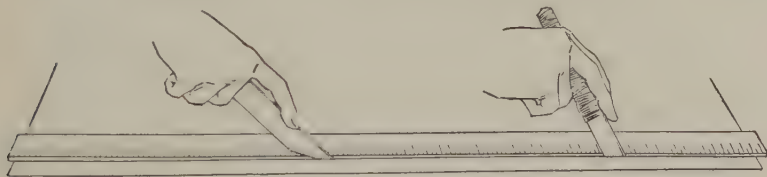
STRAIGHT EDGE AND KNIFE CUTTING
